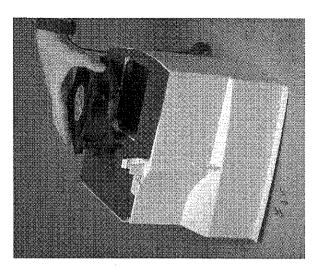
Removing the Fan from the Compressor Cover Housing
